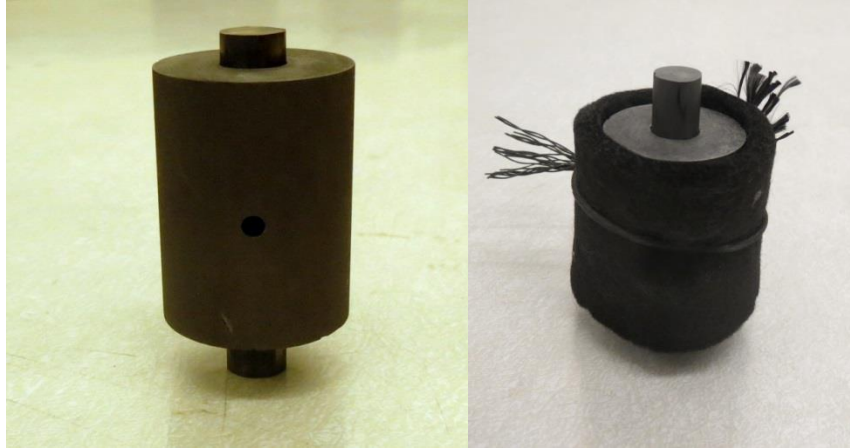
(a) Graphite die punch assembly, and (b) assembly covered with graphite blanket.
